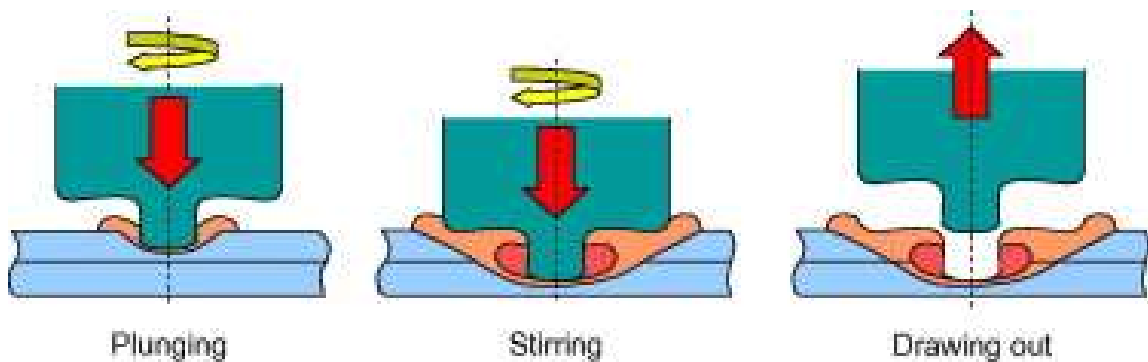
Friction Stir Spot Welding as a three-step process(Hovanski, Santella, and Grant 2007)
